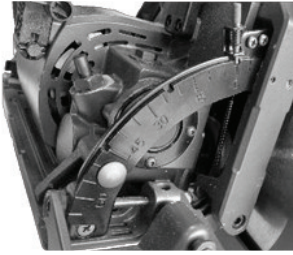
and b. Adjust depth by locating and activating release (between blade housing and motor by rear handle), move body of saw until angle provides ideal depth of blade. Quadrant gauge would be hidden by dust cover so it has been removed in this image. Once set to proper depth, reset release.
